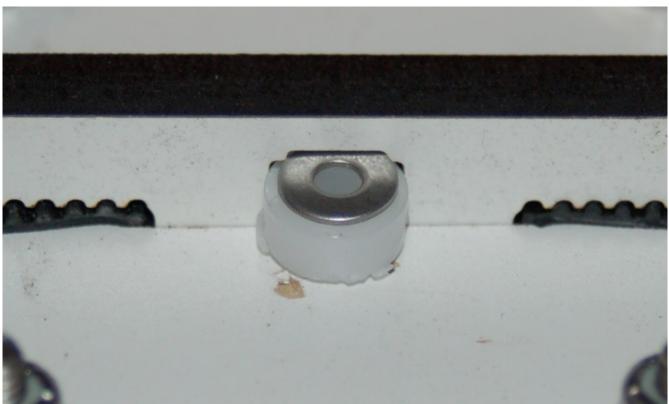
Plastic roller bearing and #4 washer in place.
